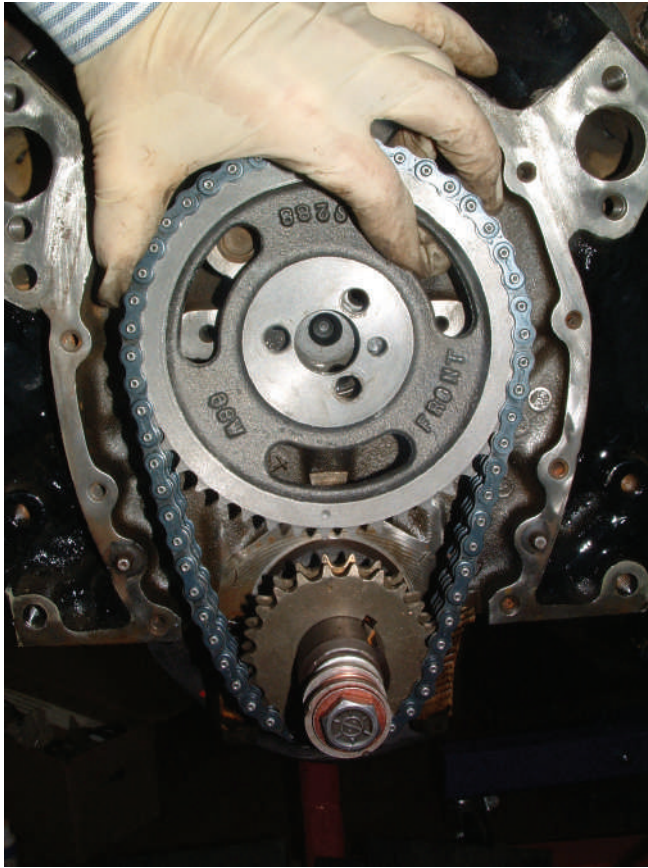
The timing gears and chain on a typical OHV engine.
